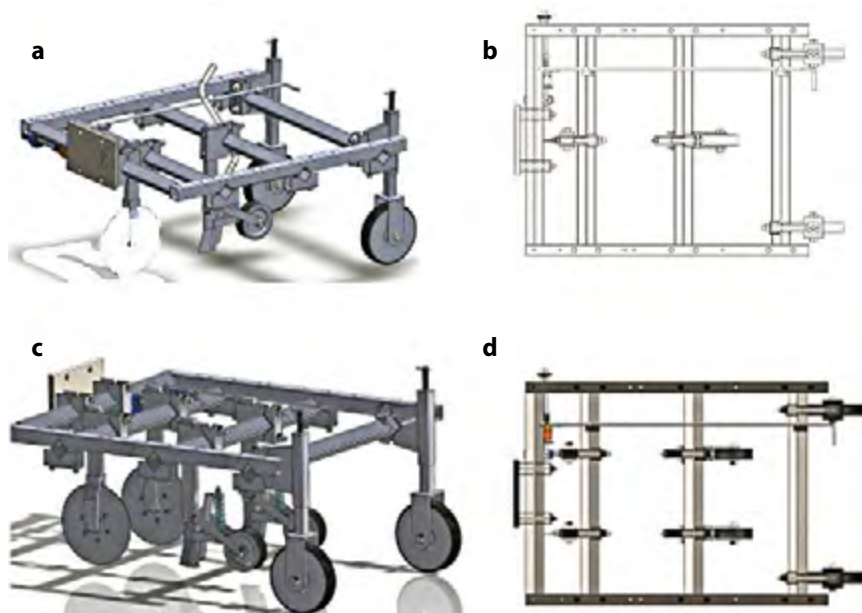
a) Single row planting configuration b) Schematic top view for single row planting configuration c) Double row planting configuration d) Schematic top view for double row planting configuration.
